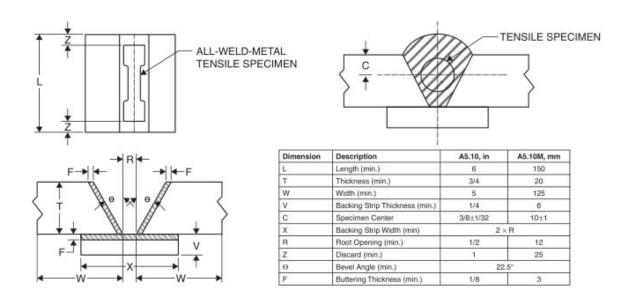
Groove Weld Test Assembly for Weld Metal Tension Properties
